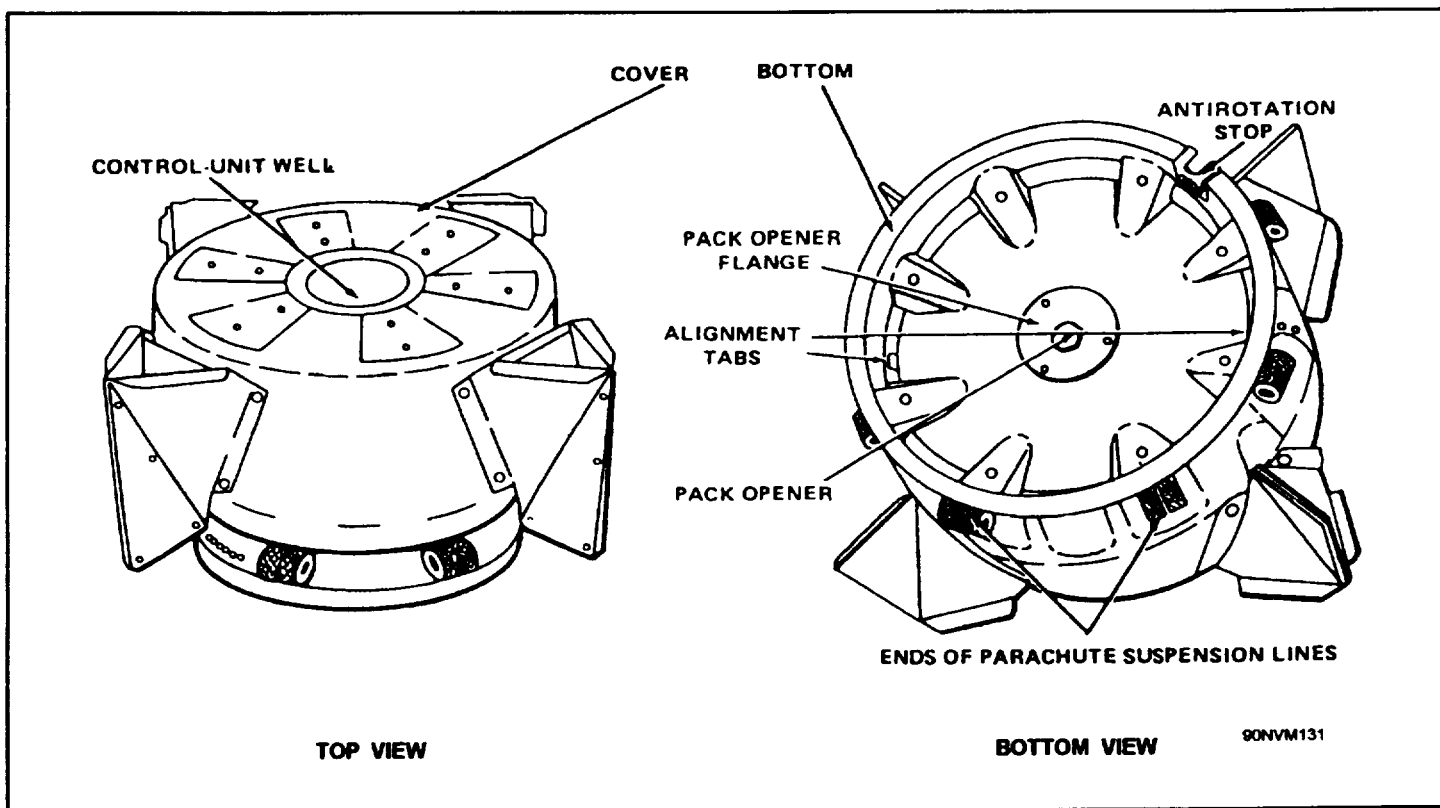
Mk 36 Mod 0 parachute pack assembly.
